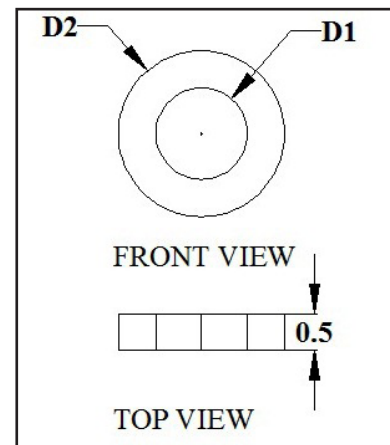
2D Sectional View Representation of Computer Aided Design
